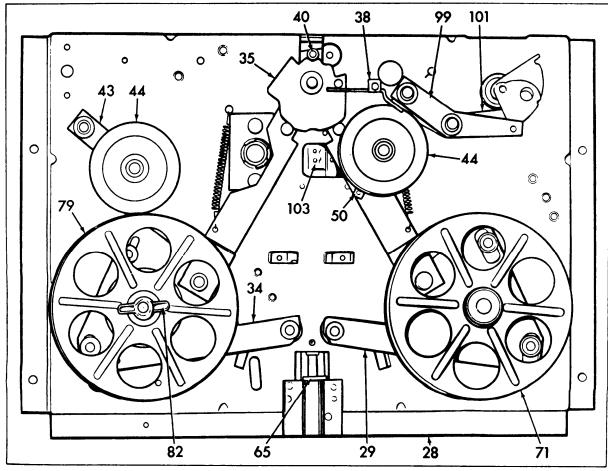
Mechanism Assembly without Motor and Plate Assembly - Bottom View
